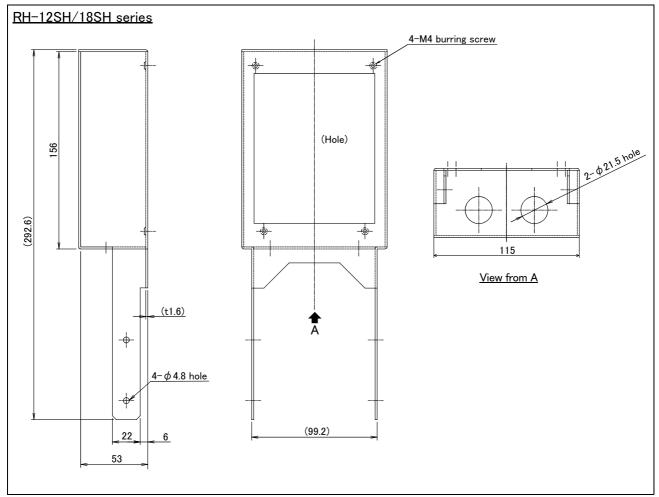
Outside dimensions of solenoid valve box (RH-12SH/18SH series)
